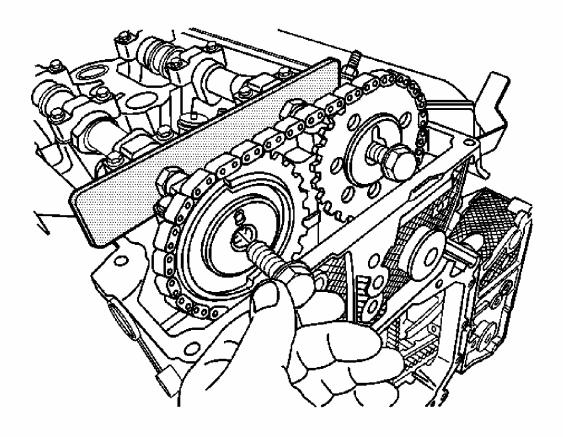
Identifying Right Exhaust Camshaft Sprocket Bolt Courtesy of GENERAL MOTORS CORP.
